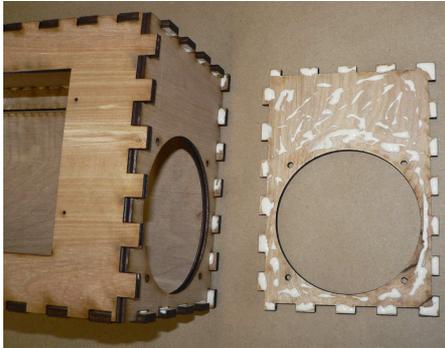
The thickness of faces containing loudspeaker drivers can be doubled simply by gluing two layers of laser-cut plywood together.
